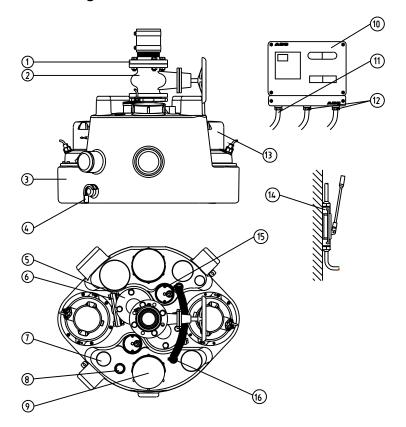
Design of the lifting station Sanimat 1002 and Piranhamat 1002
